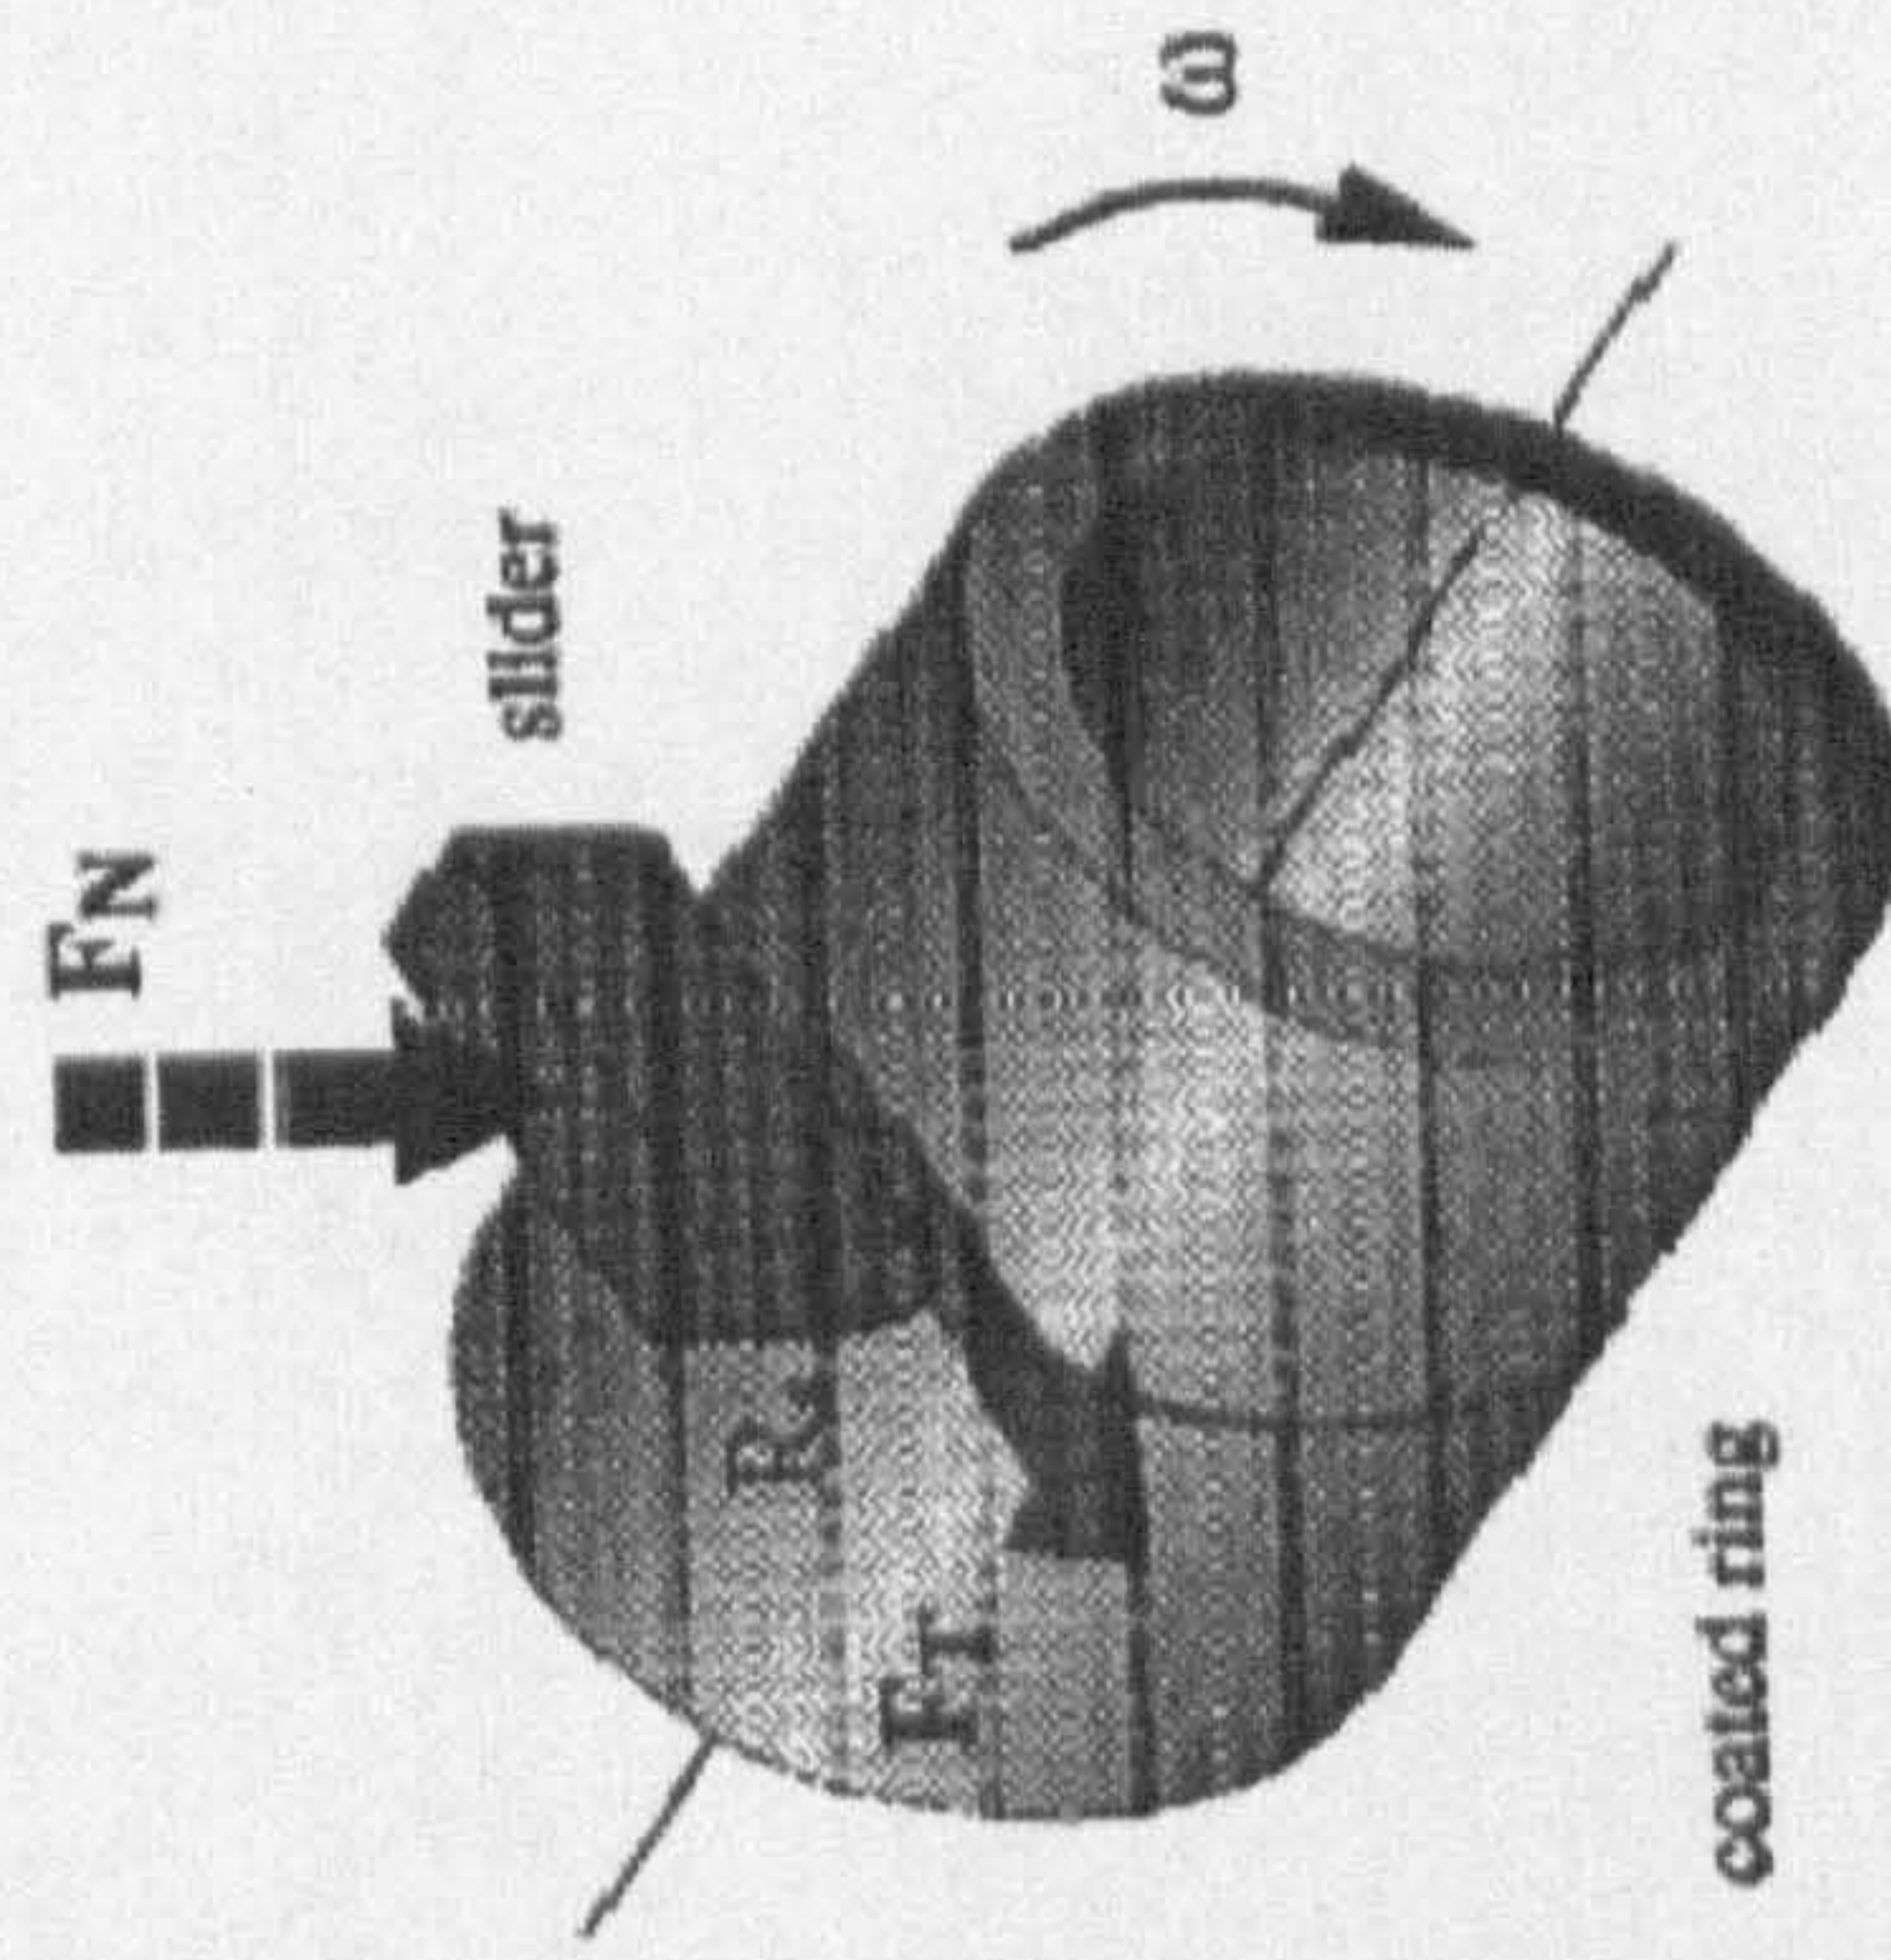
Friction-seizure test of cold forging coatings [53]
